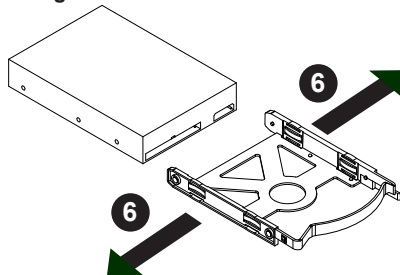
Removing the Hard Drive Carrier from the Hard Drive Cage
